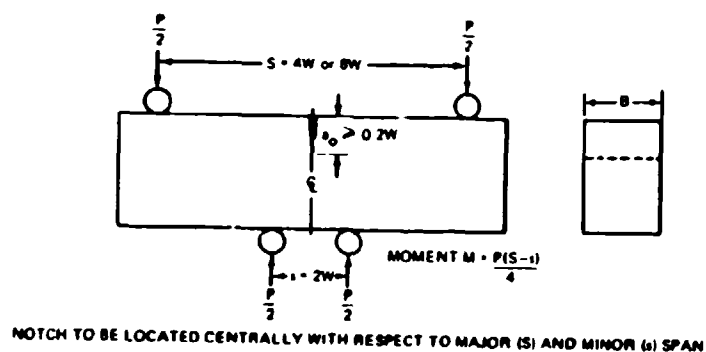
Four Point Notched Bend (4-NB) Specimen.
